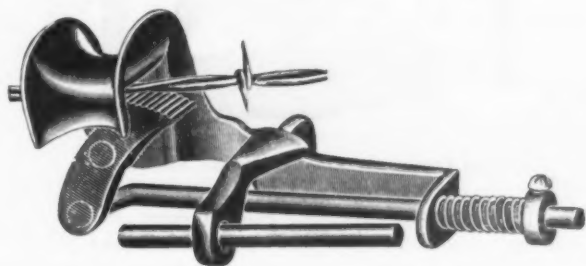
Enlarged View of Jaws on Wilcox Stretcher.
